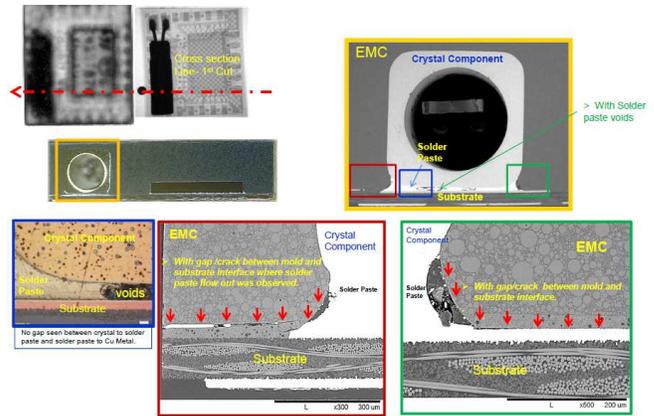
Cross-section results of the larger pad design (1st version with lead-free solder 1).
